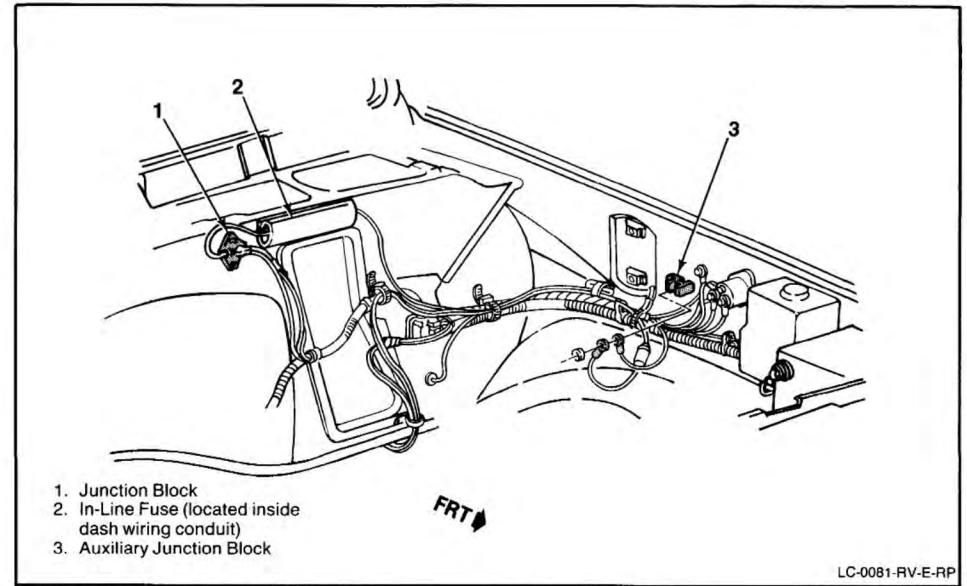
Camper and Trailer Equipment Harness — Engine Compartment
